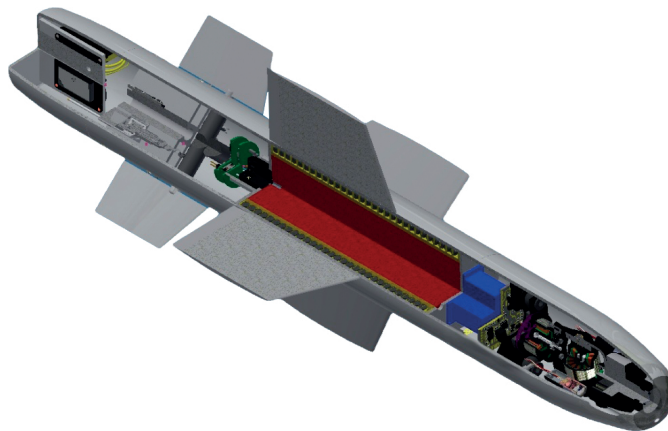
The bomb cutaway drawing with main elements placed inside the fuselage
